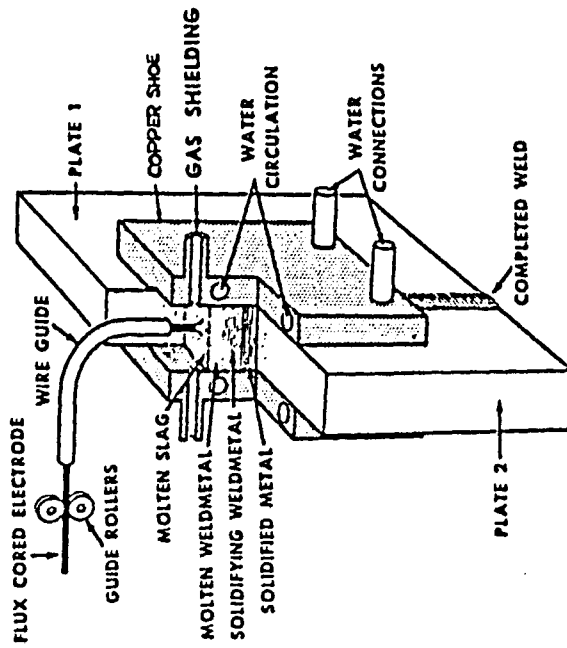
General electroslag welding configuration (from ref. 26).
